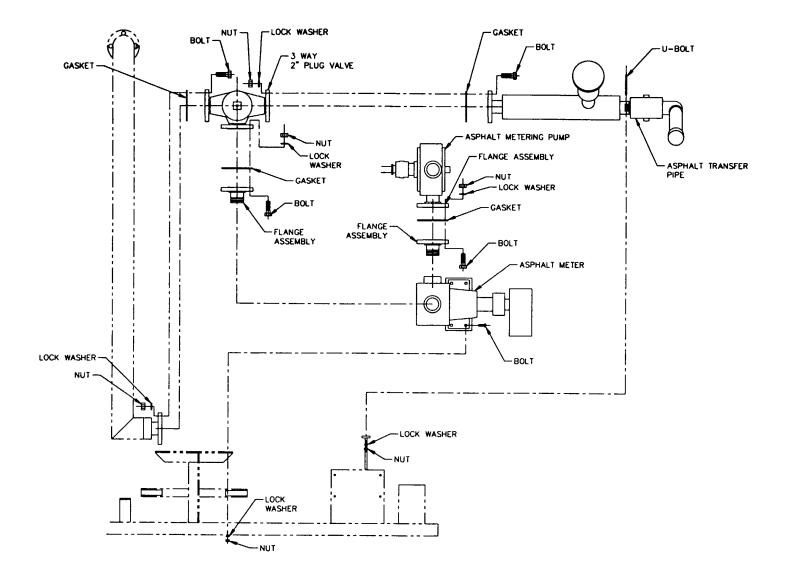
Asphalt Metering Pump Assembly Page 3 - 1186
